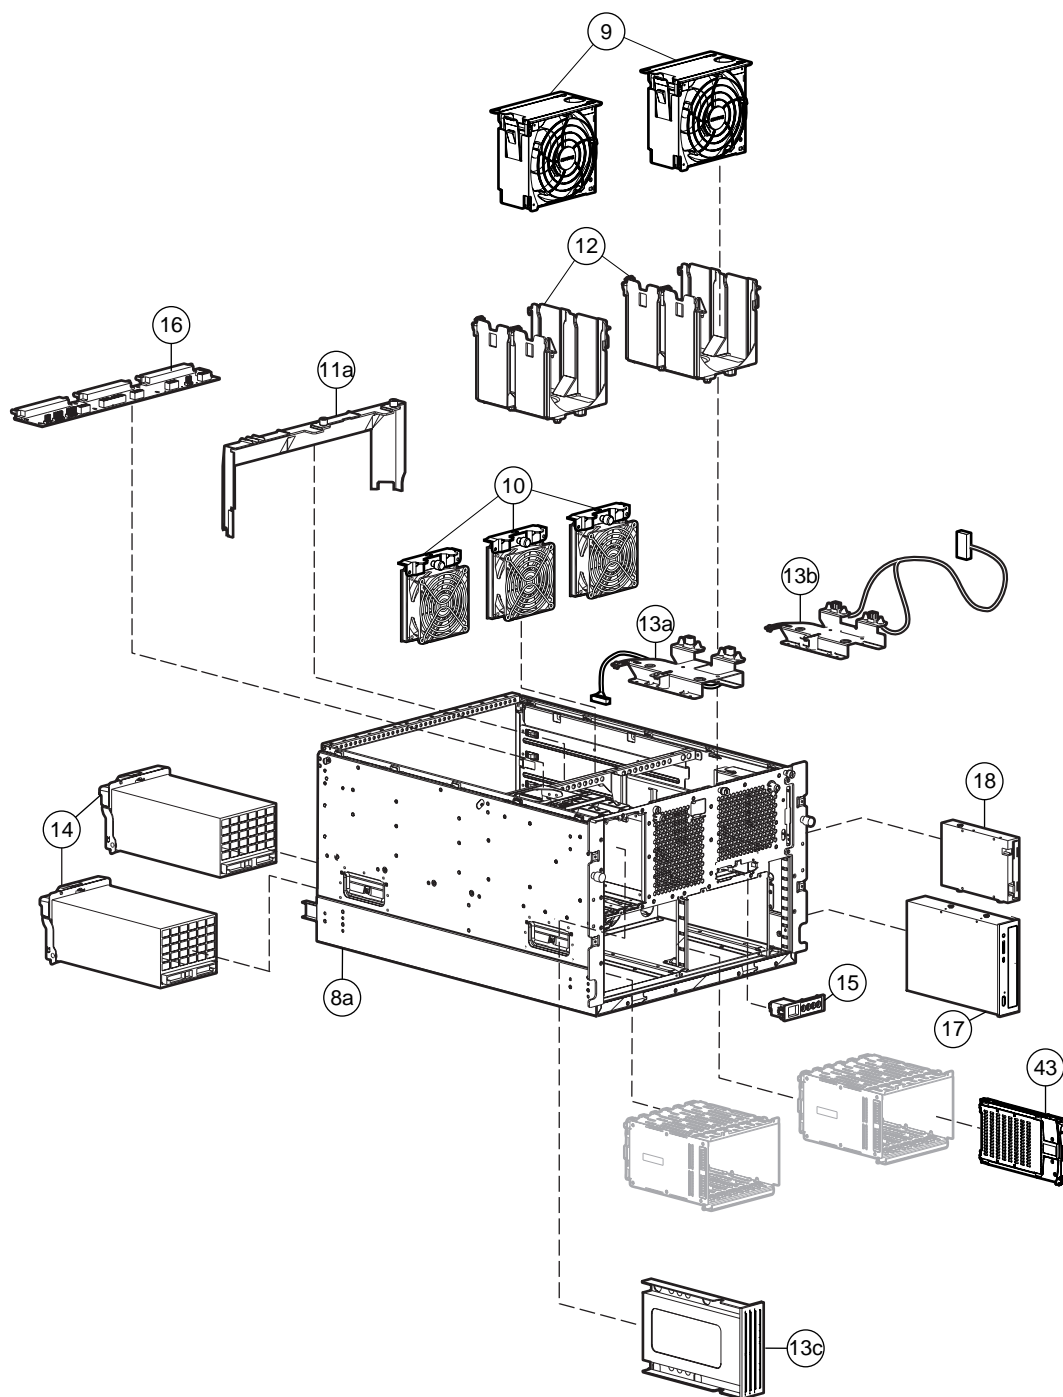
Exploded view of the ProLiant ML570 server system components
